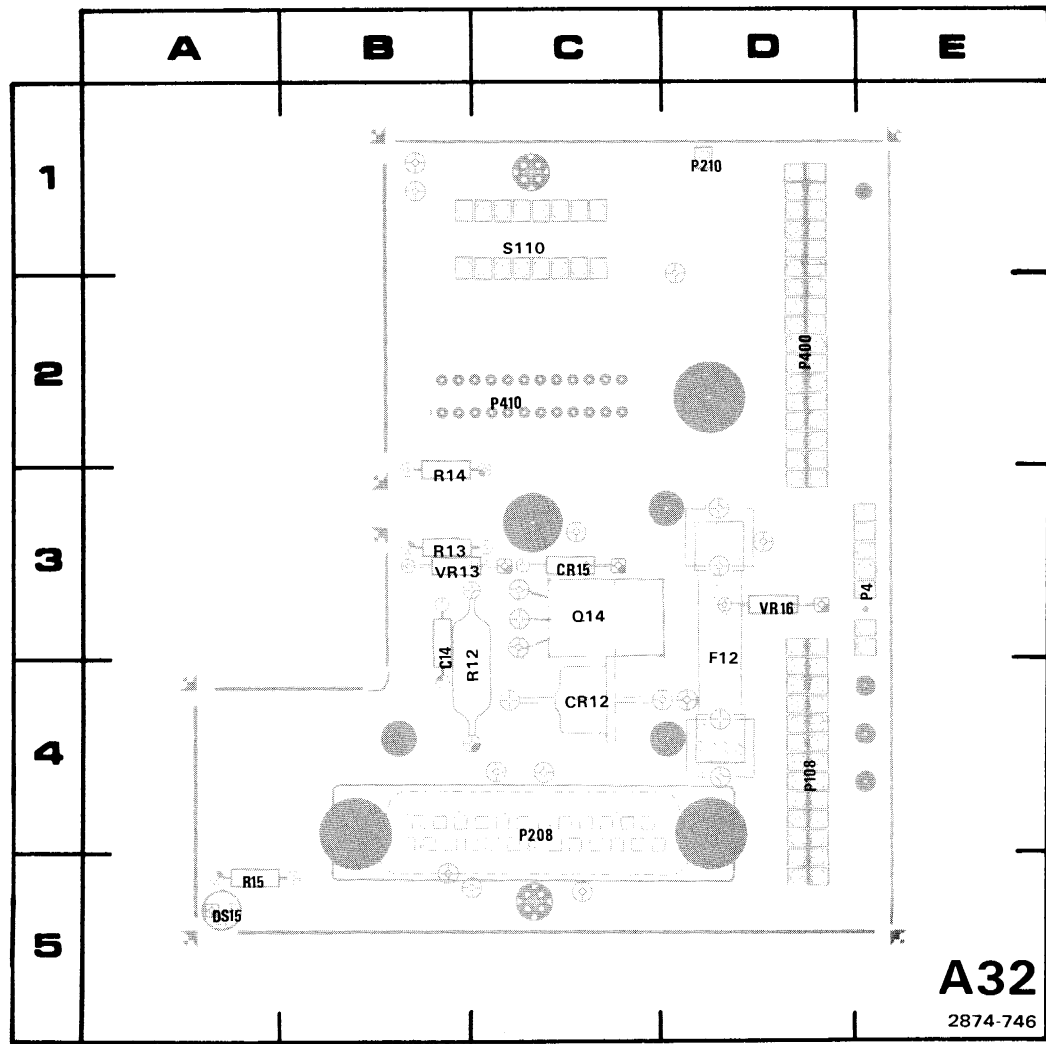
A32—Rear Panel Connector circuit board assembly.
